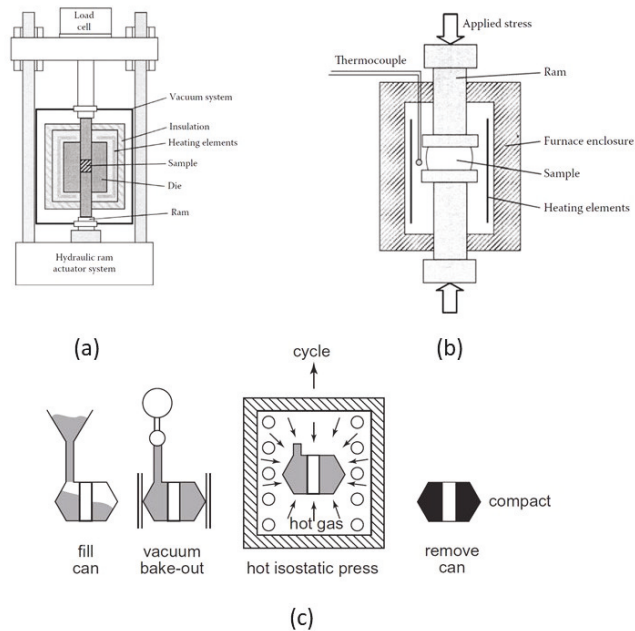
Schematic of pressure assisted sintering techniques; (a) hot pressing, where pressure is applied along the vertical axis [41], (b) sinter forging [41] and (c) hot isostatic process, illustrating different steps involved in the HIP process [57]
